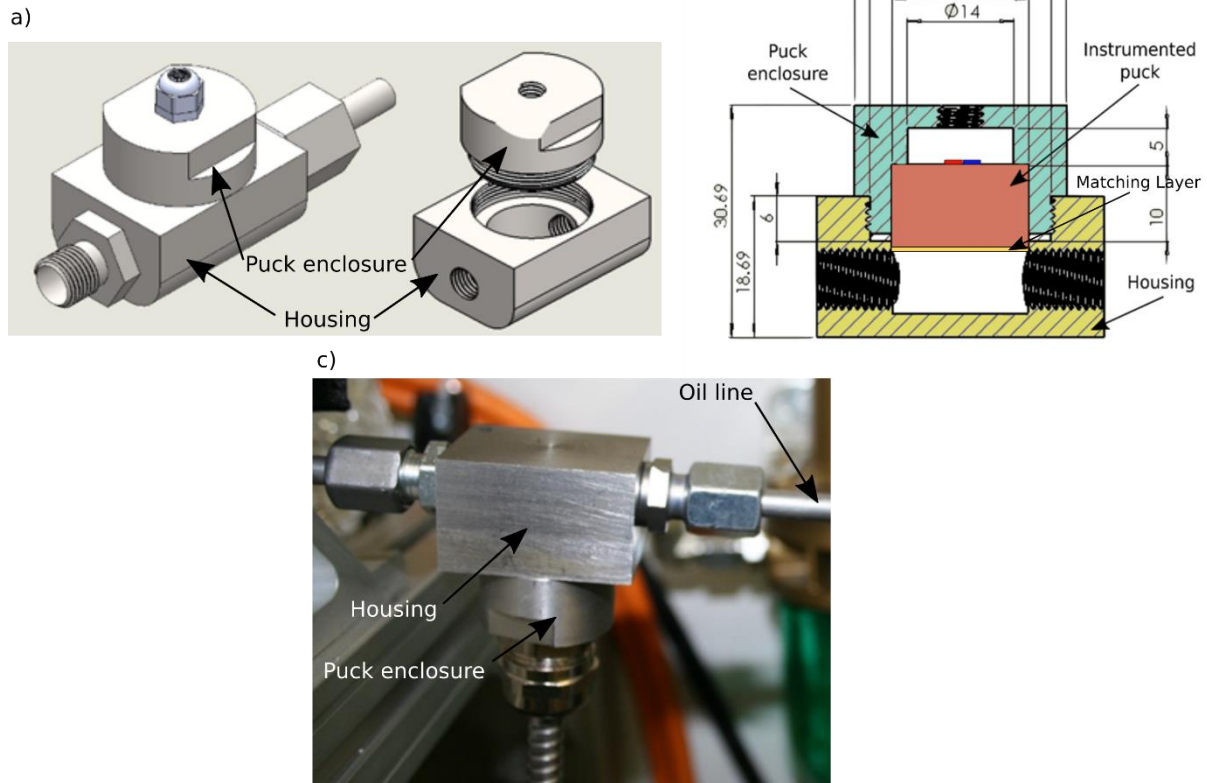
a) CAD ELV design, b) CAD side view of ELV, c) Image of ELV installed in oil line.
